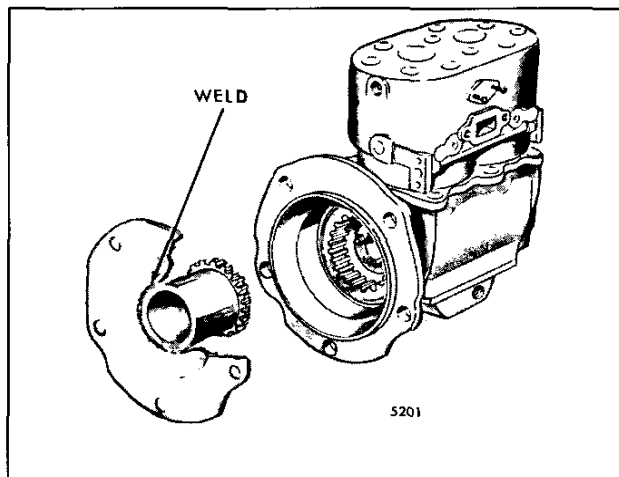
Fixture for Holding Drive While Installing or Removing Slotted Nut
